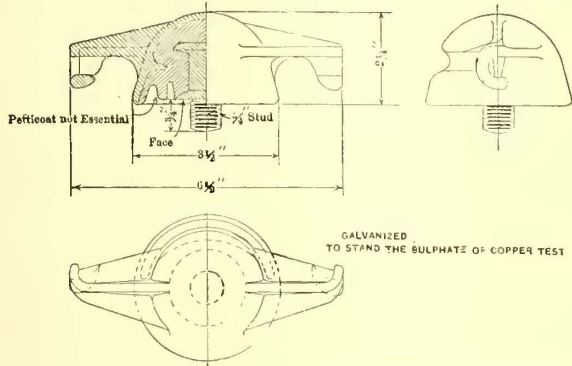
D—Wood Break Strain Insulator for Cable up to and Including 300,000 Circ. Mil.
